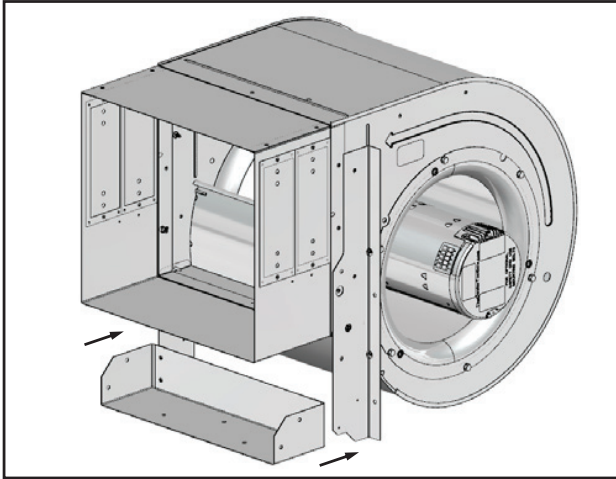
Slide Blower Assembly Away from Mounting Bracket
